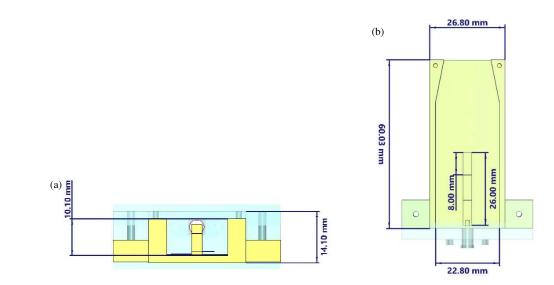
Dimension (a) side view and (b) top view of the 3D printed waveguide antenna.
